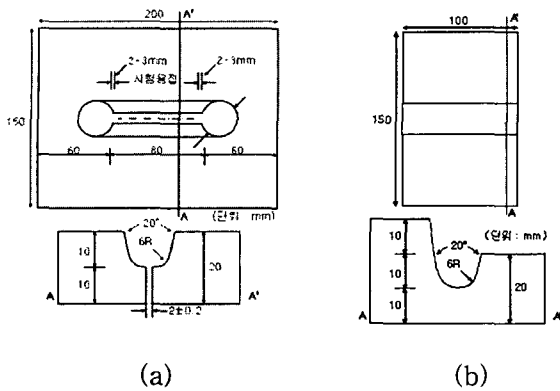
Shape of U-groove cracking test and J-type specimens.
